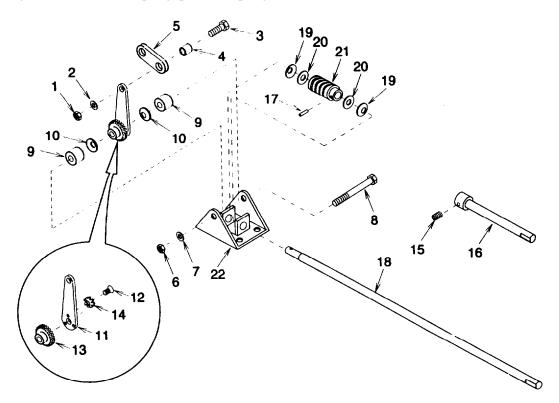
Rod, Arm, and Worm Gear Assembly
